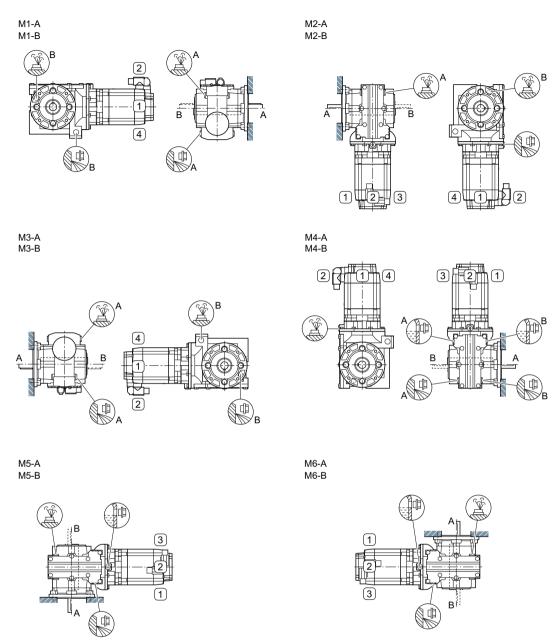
Mounting positions for servo helical worm geared motor CF (flange design) and CAZ (housing flange design), frame size 29, 2 stage
